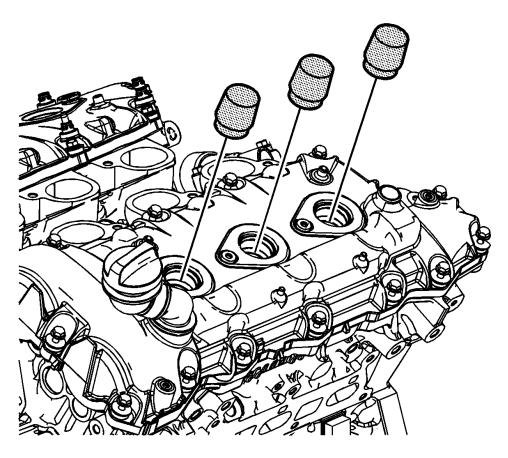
View of Spark Plug Tubes & Cylinder Head Courtesy of GENERAL MOTORS COMPANY
